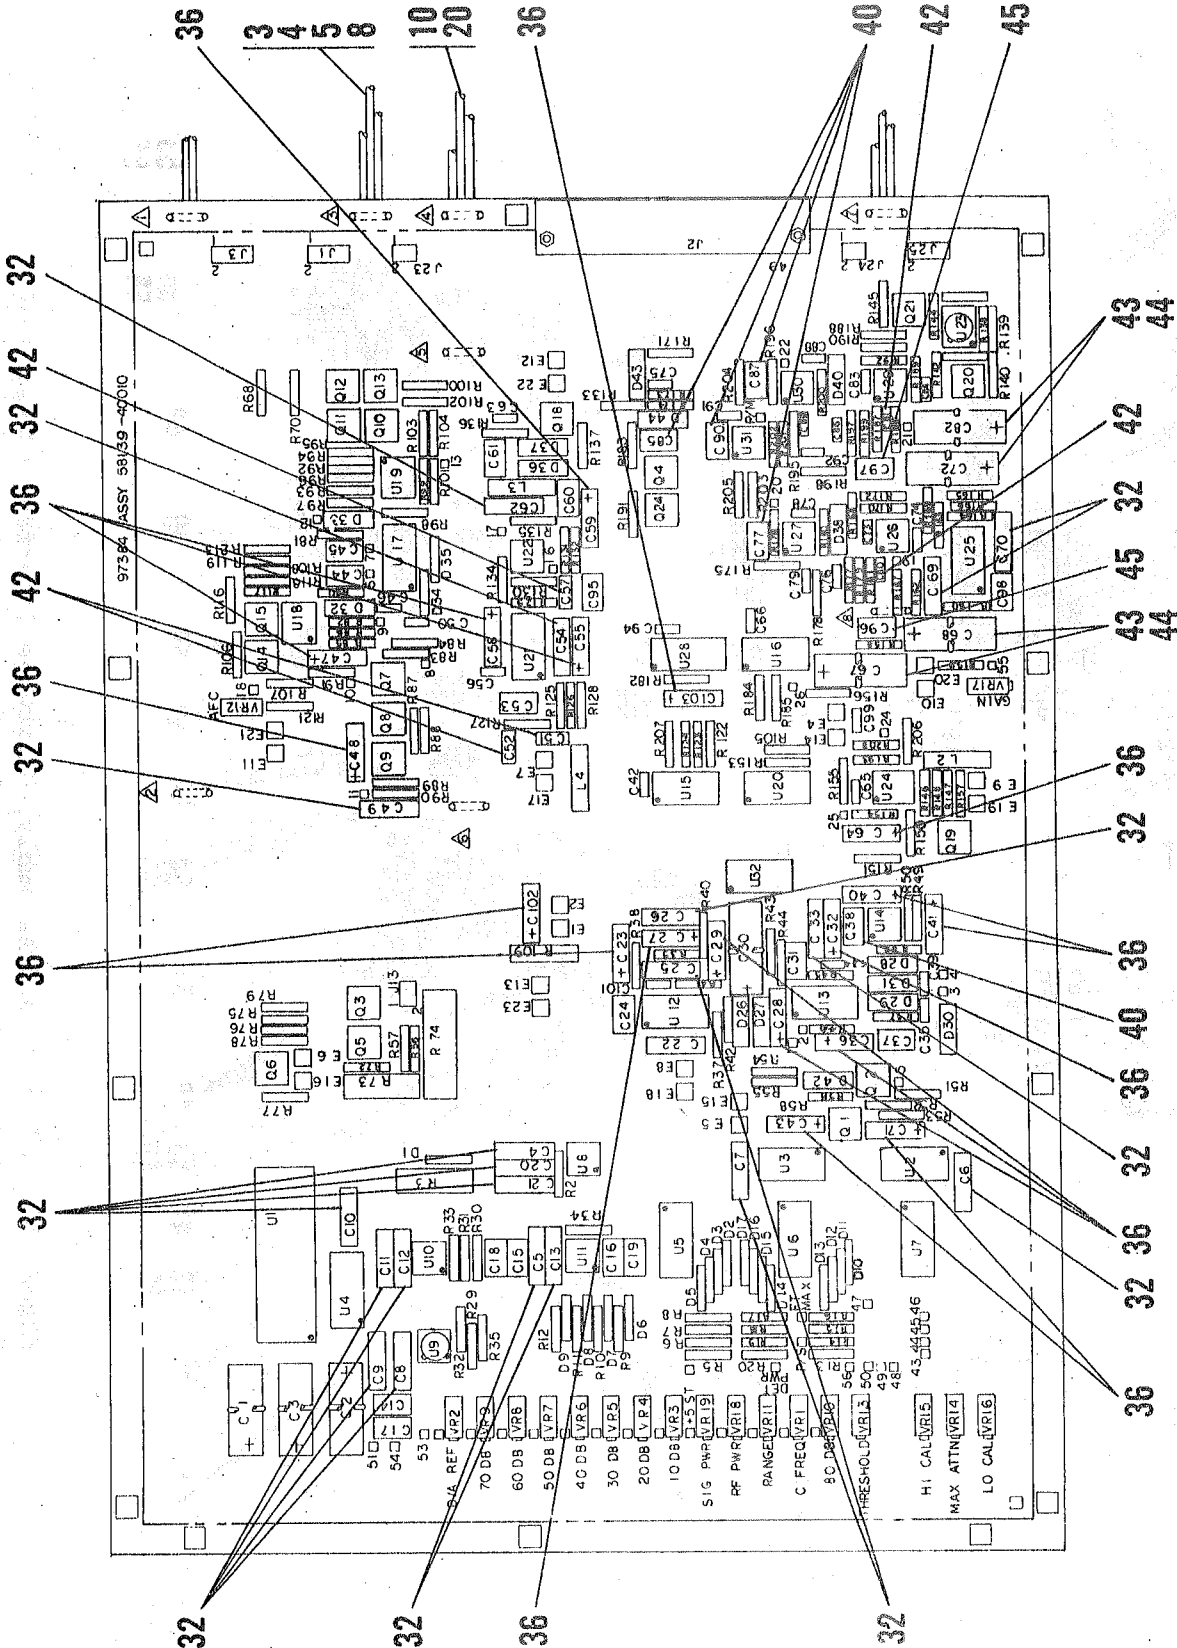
Circuit Card Assembly, Microwave Interface (Sheet 2 of 7)
